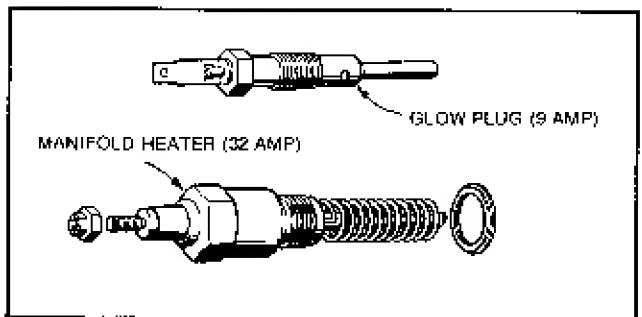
GLOW PLUG AND MANIFOLD HEATER
